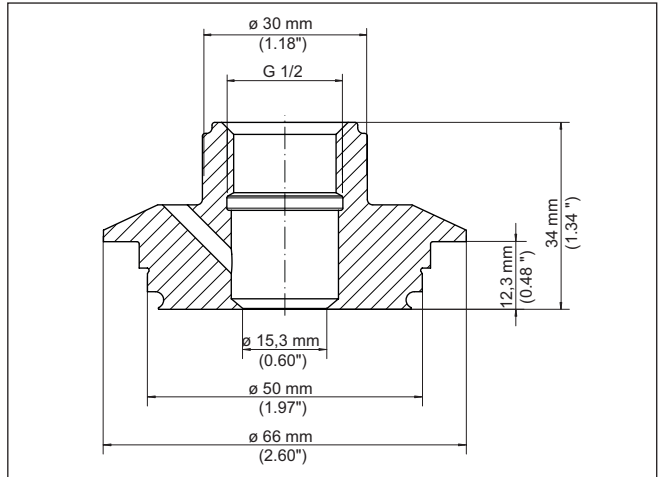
Dimensions hygienic adapter G $\frac{1}{2}$ (DIN 3852-X) on Varivent Form F DN 25 - Cone seal
